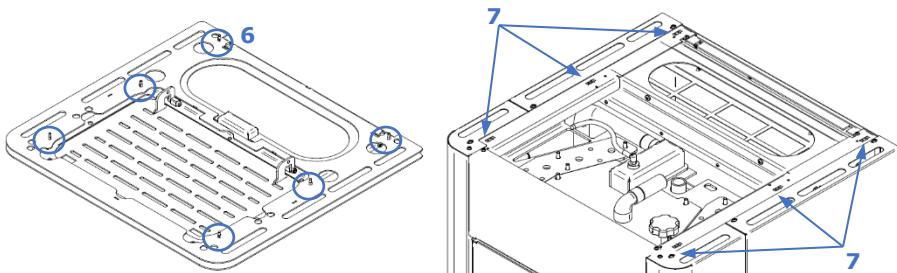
Assembly of the casings Hidro 17 and Hidro 23
